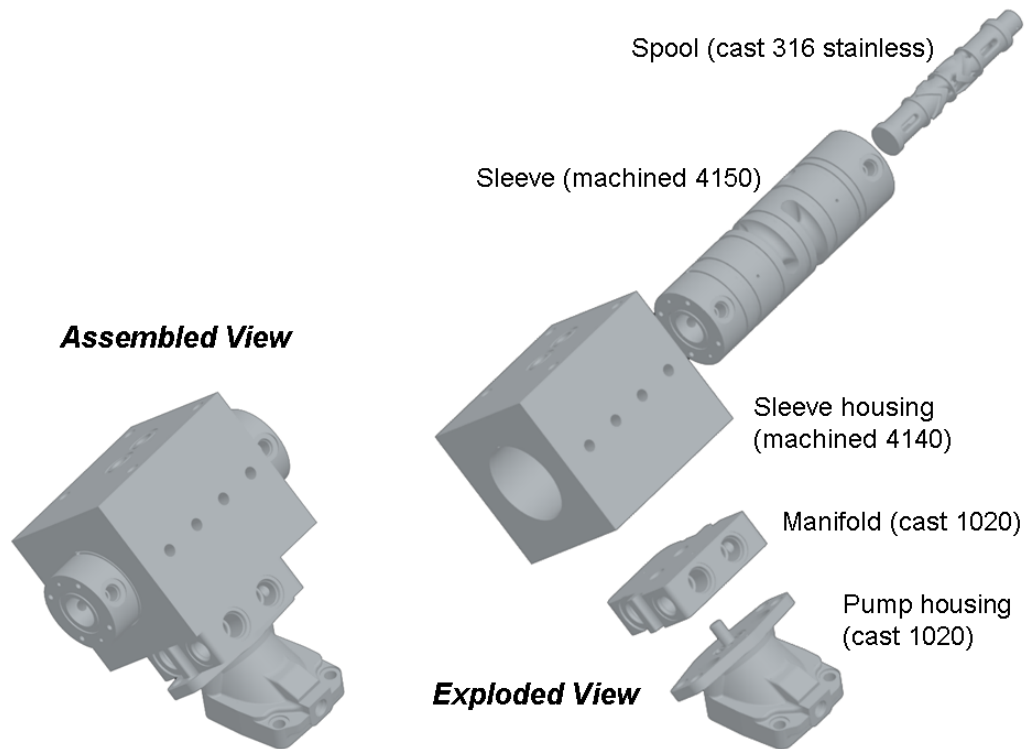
Assembled and exploded renders of the 4-way prototype rotary valve.
